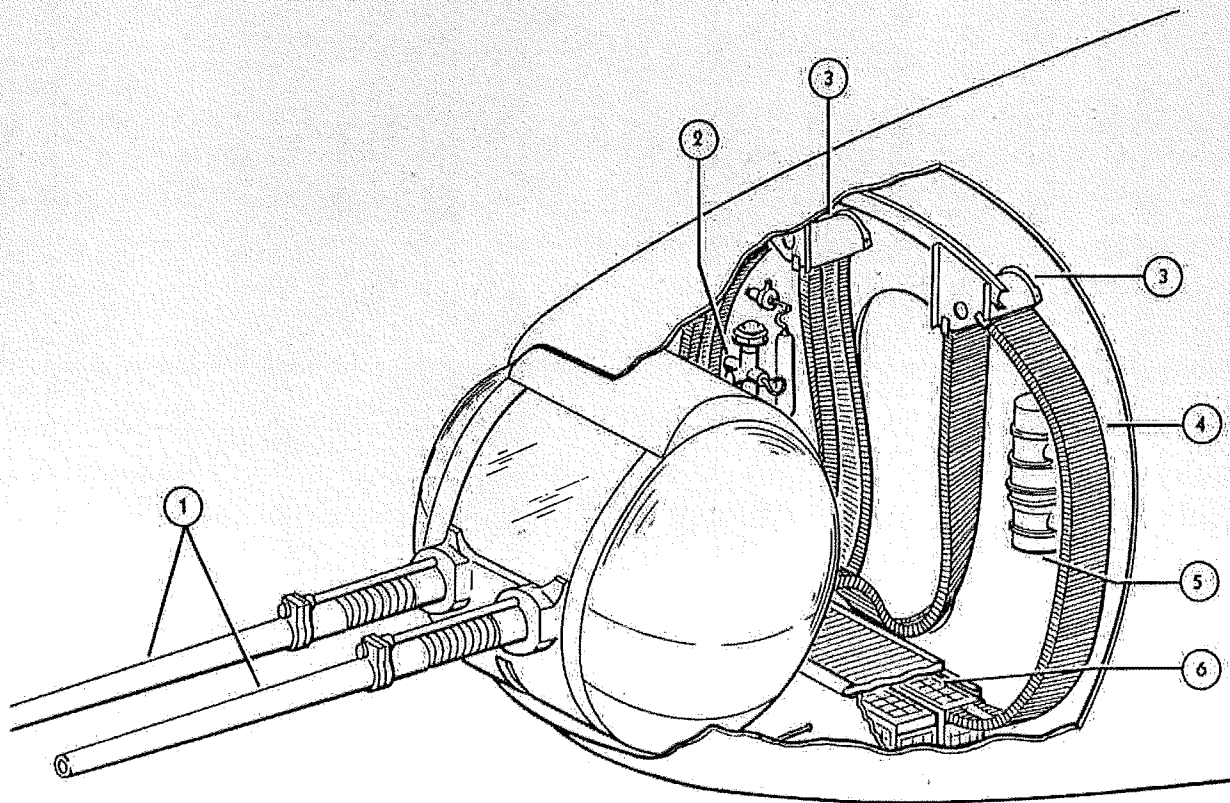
(Sheet 1 of 2 Sheets) - Bow Turret
